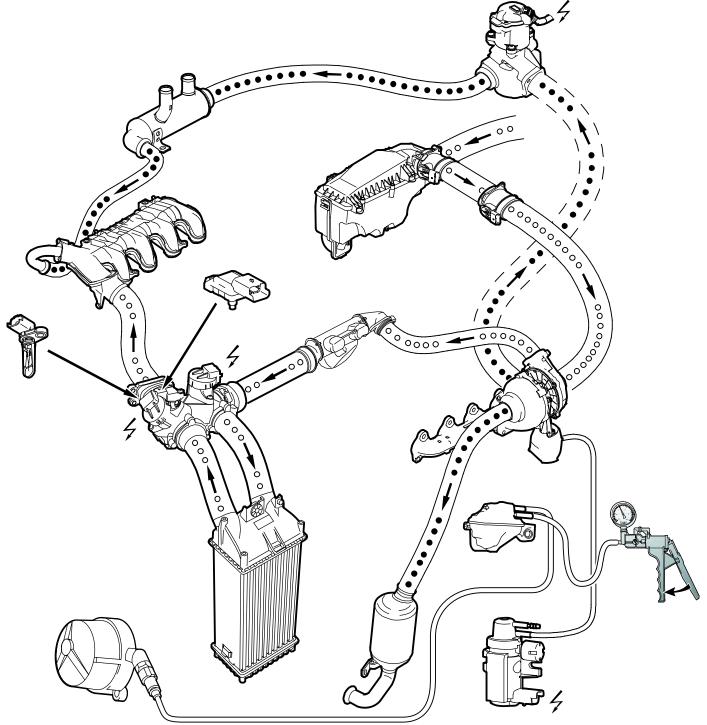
Checking vacuum circuit without coupling (EDC16 C34)
